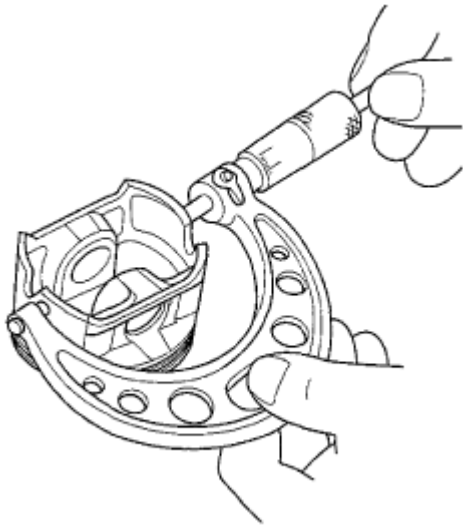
Measuring Piston Skirt Diameter At Point 16 mm (0.63 in) From Bottom Of Skirt
